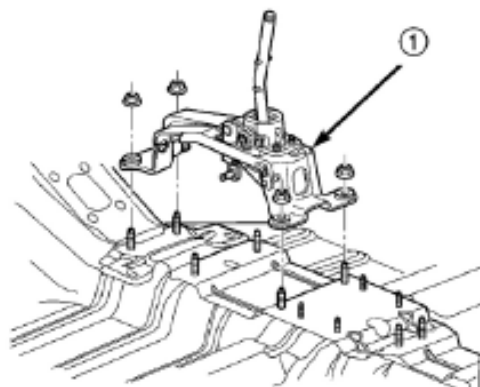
Disassembly/Assembly of shift bracket assembly
